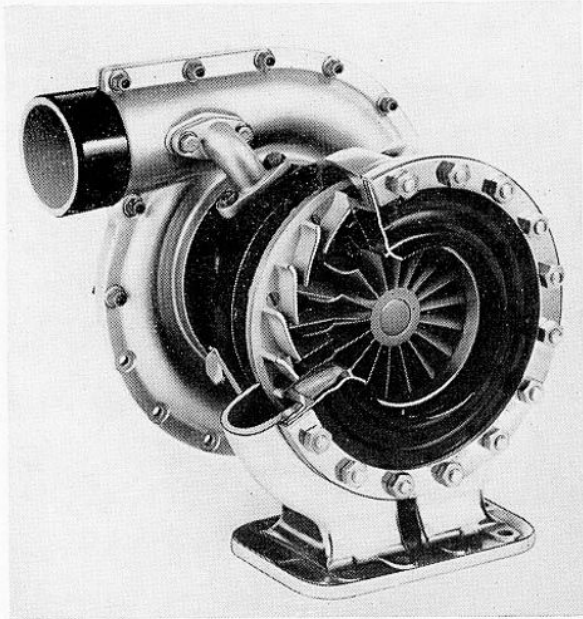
PART SECTIONED VIEW OF TURBOCHARGER
